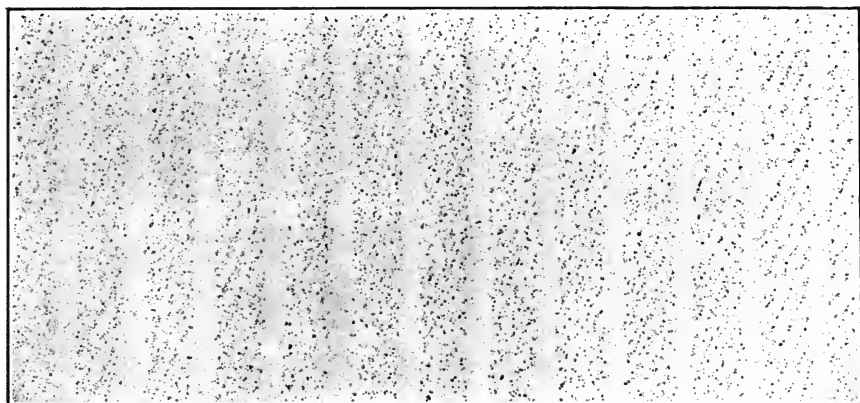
THREE TO THE INCH SOLID; STRAIGHT-CUT BURR. CUT OVER WITH TWELVE TO THE INCH SOLID; SPIRAL BURR. (HEMLOCK RUN NO. 51.)
